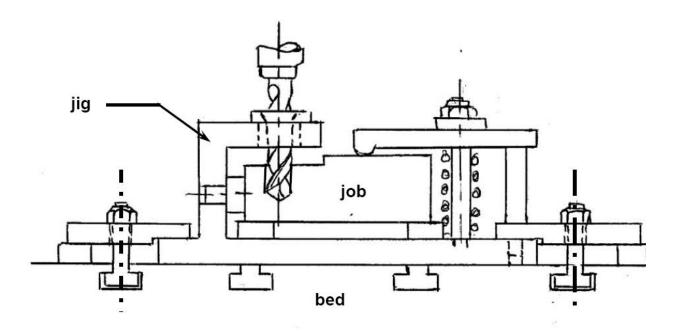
Mounting of job in a jig which is clamped on the drill - be
